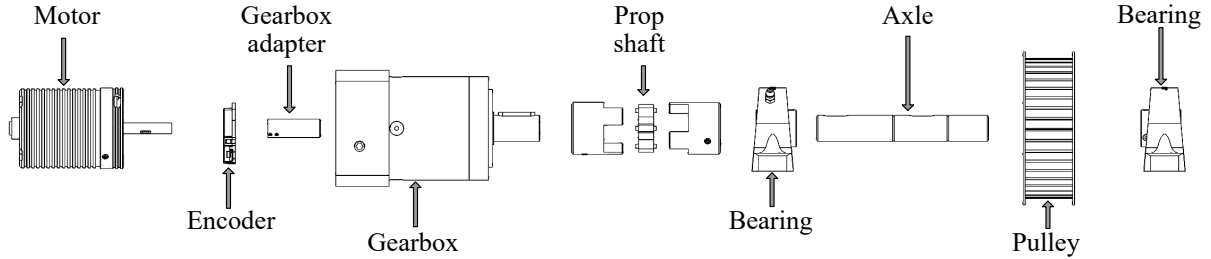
CAD model of the gearbox and motor assembly. Made with Solid Edge 2020, and Affinity Designer.
